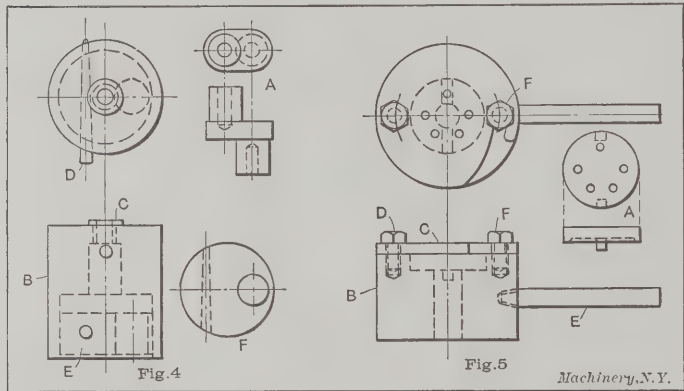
Ingenious Form of Jig for Drilling Crank A
